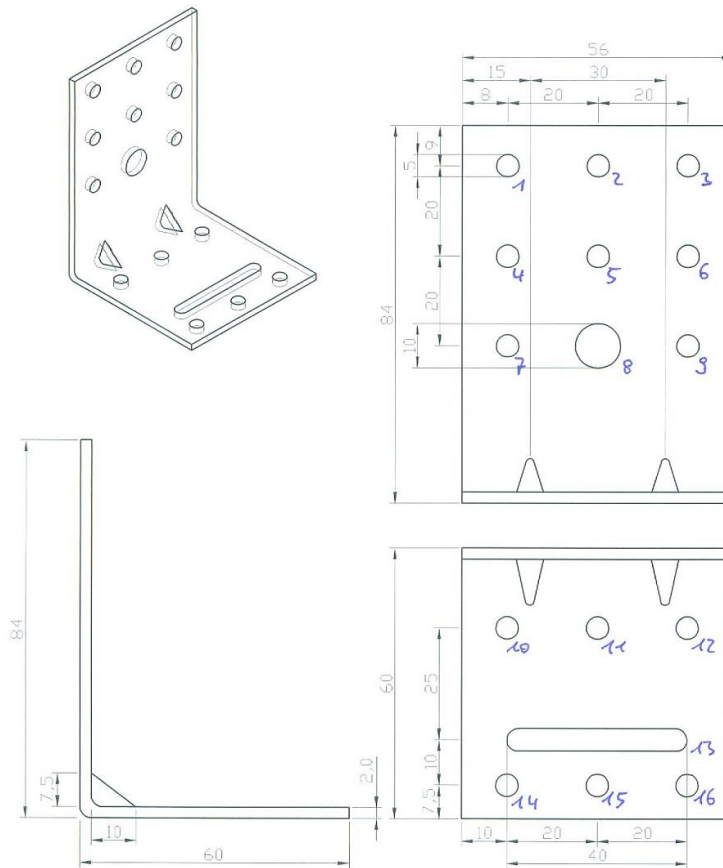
Angle Bracket 243 609 061 60x90x60
